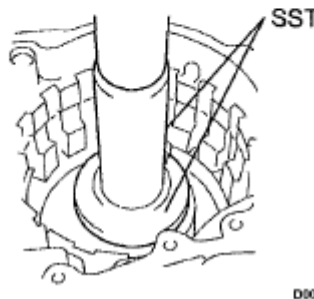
Installing Bearings Outer Races To Transaxle Case
